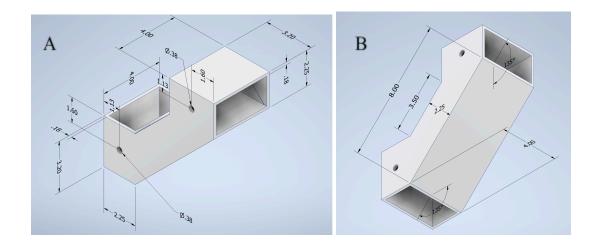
Bracer Bar. Inventor Drawings by Lydia Miller and Jacob Schwartz. All dimensions are in inches.
